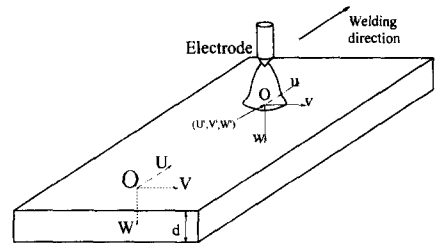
Coordinate system of 3-dimensional plate weldment with finite thickness
